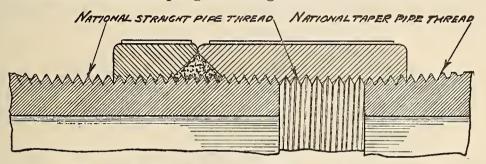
Illustration of "long screw" joint between straight threaded coupling and taper threaded pipe
